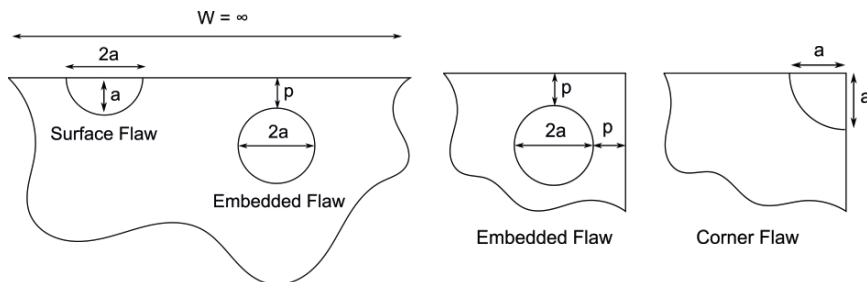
Flaw geometries. (a) Typical surface and embedded flaw; (b) Corner embedded flaw; (c) Corner flaw.
